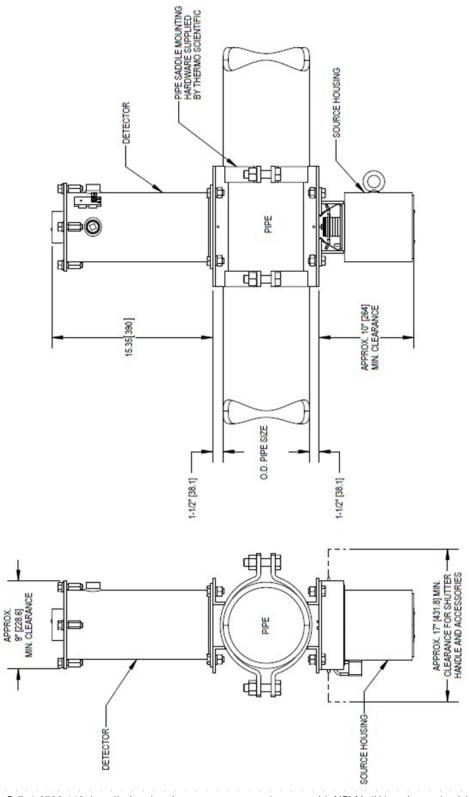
4-0700-146: Installation drawing, remote system detector with NEMA 4X housing and quick connects
